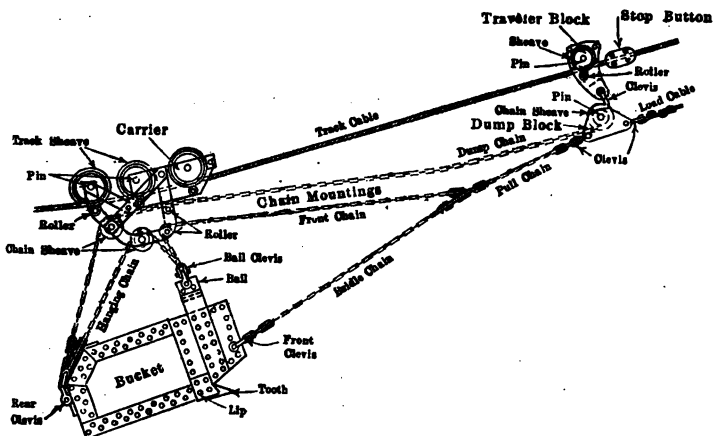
Assembly of the Sauerman (Shearer and Mayco Type) Dragline Cableway Bucket, Carrier and Mountings.
